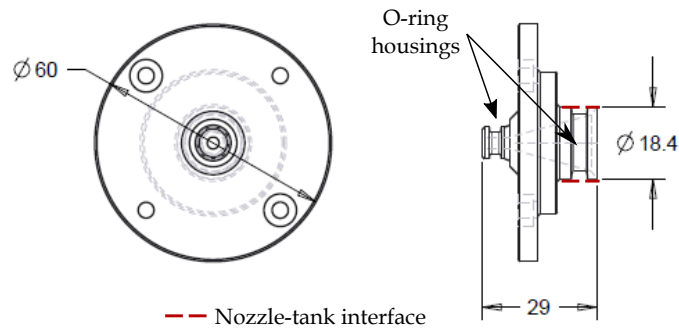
Nozzle: main dimensions and o-rings housings.
